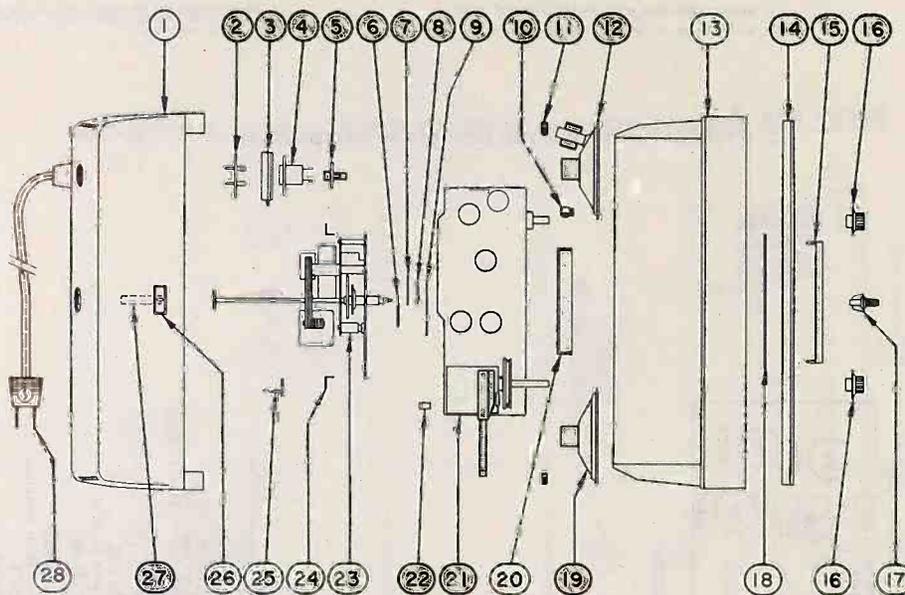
EXPLODED VIEW OF CABINET PARTS
